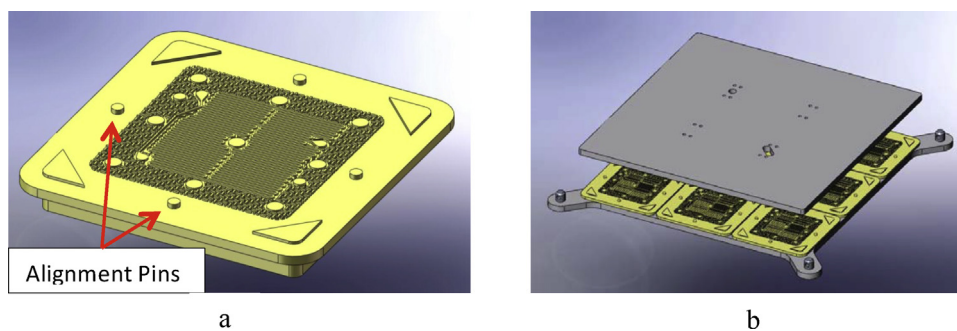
(a) Lamina die and (b) die fixture assembly.
